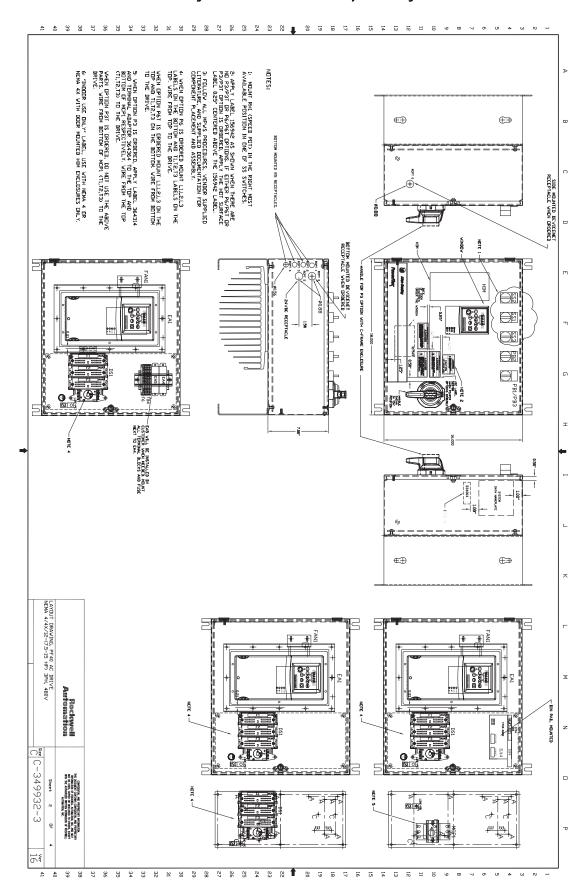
PowerFlex 40 Frame C Layout Drawing
